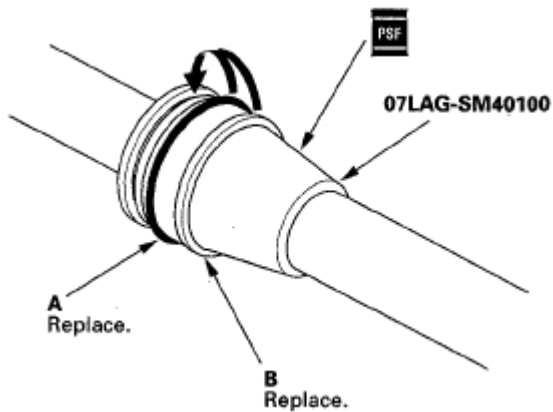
Identifying Seal Ring On Piston Seal Ring Guide
